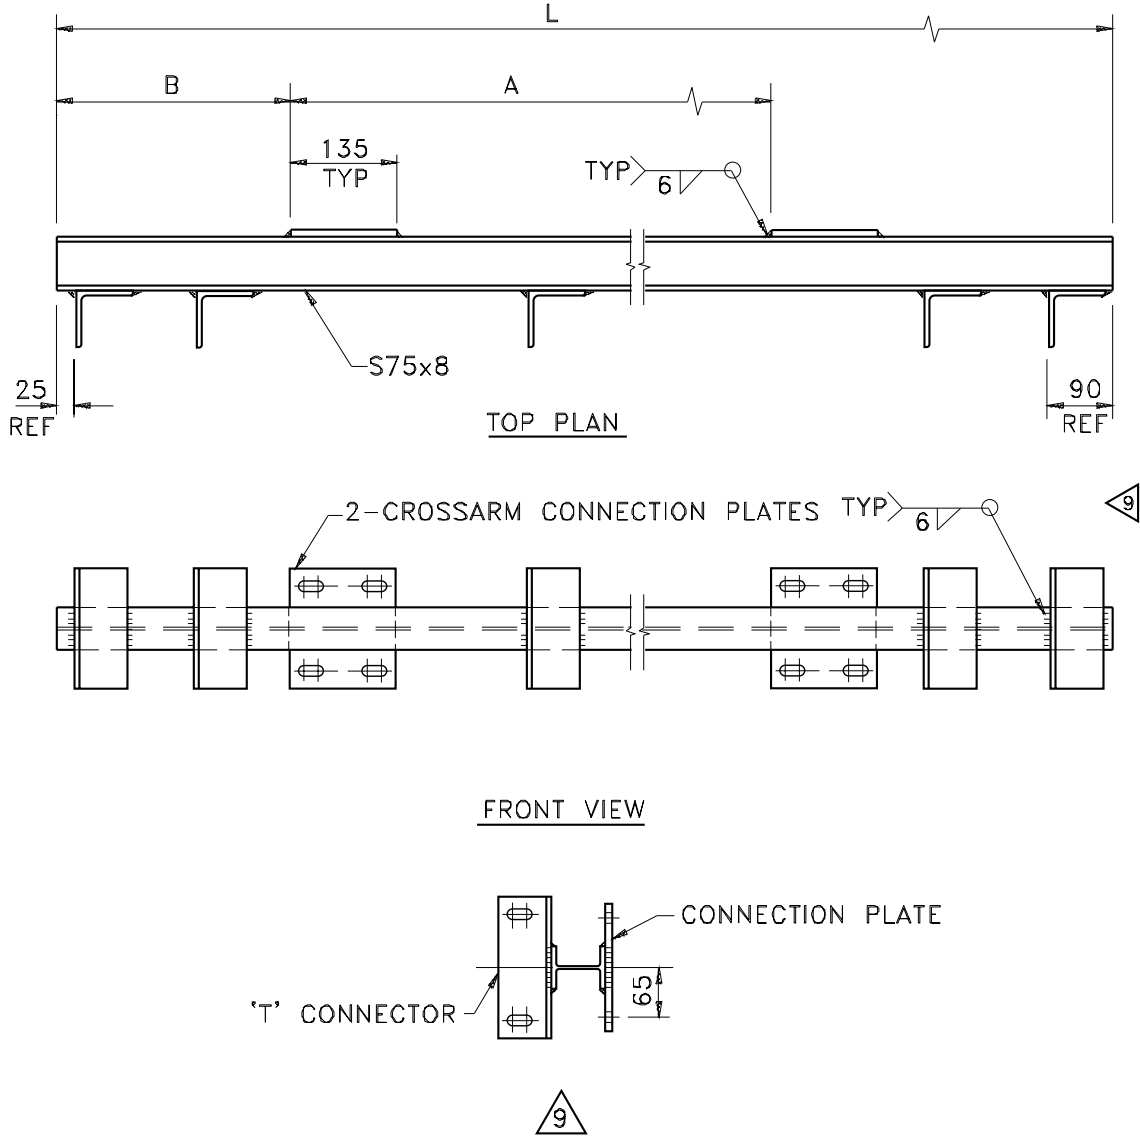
Top Crossarm or Crossarm Details (Steel, Extended, Two Connection Plates)
